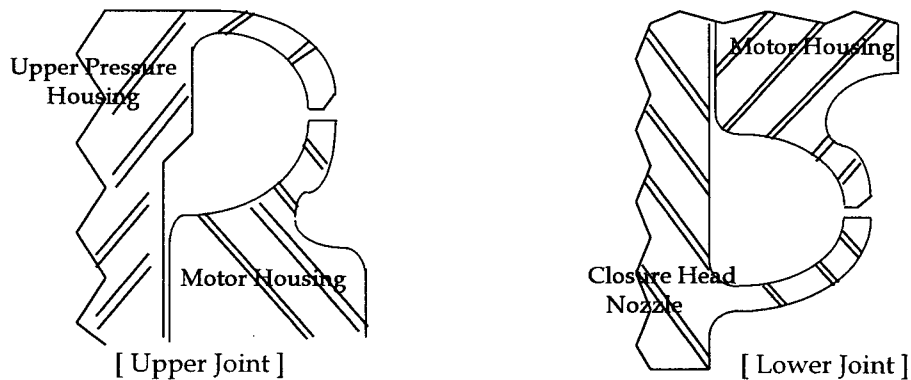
A Schematic configuration of Omega Seal Welding Joint
